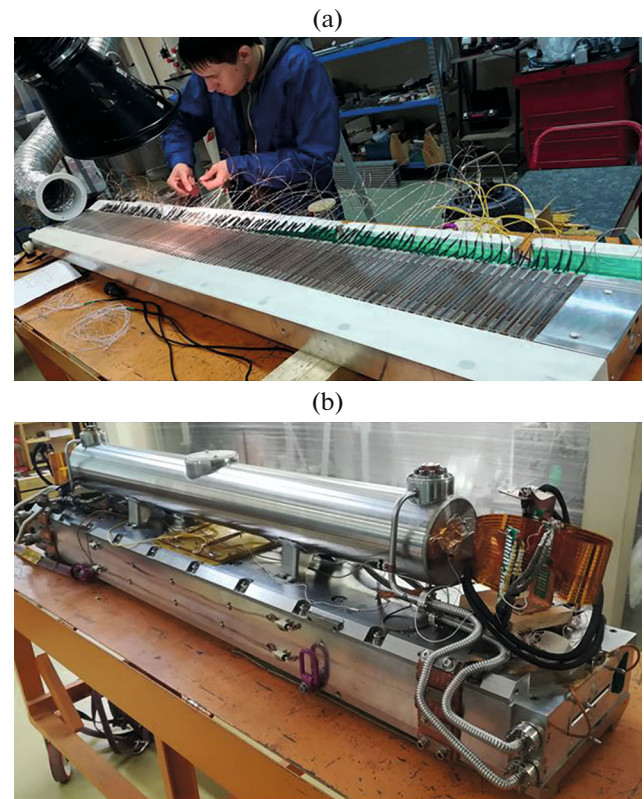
Appearance of the undulator magnet: (a) halves of the magnet in the process of assembly and (b) the magnet assembled with the helium vessel installed.
